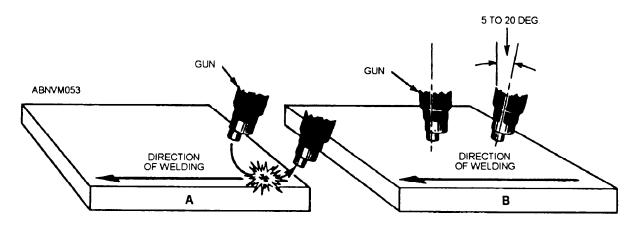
GMA welding. (A) Striking the arc. (B) Gun angle.
